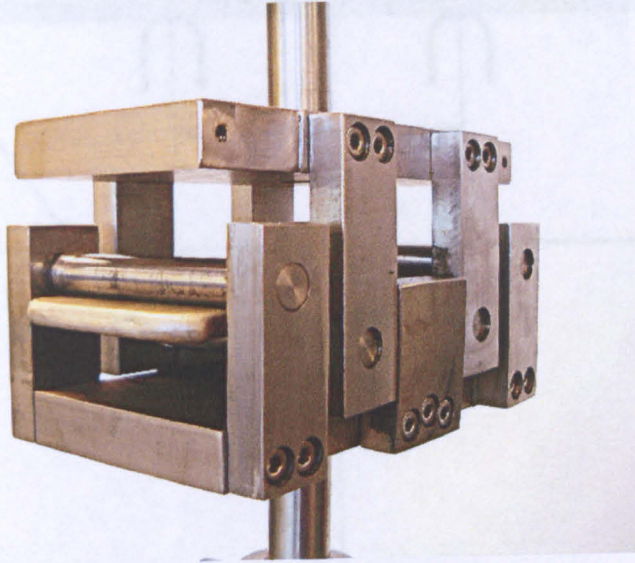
Four-point test jig showing 10mm diameter rollers
